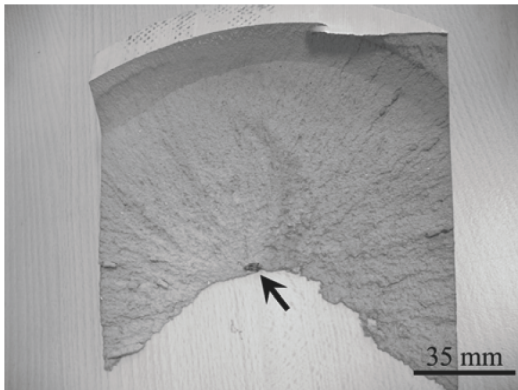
The cold crack surface in the billet cast at 110 mm/min and water flow rate of 90 l/min. The dark point shown by an arrow triggered the fracture. The chevron markings radiating from this oxide inclusion indicate its role in the fracture.
